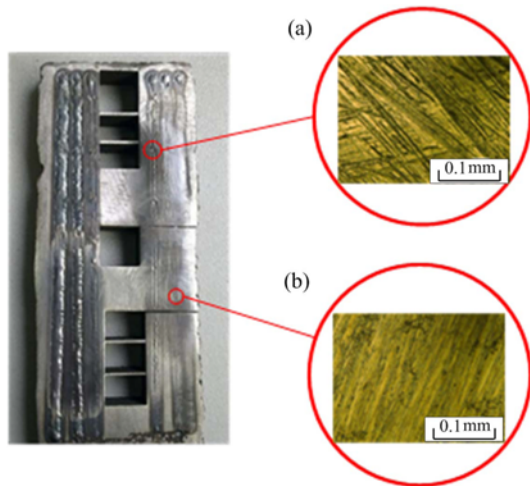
Microgram of laser hardening surface: (a) Before machined (b) After machined by SCA
